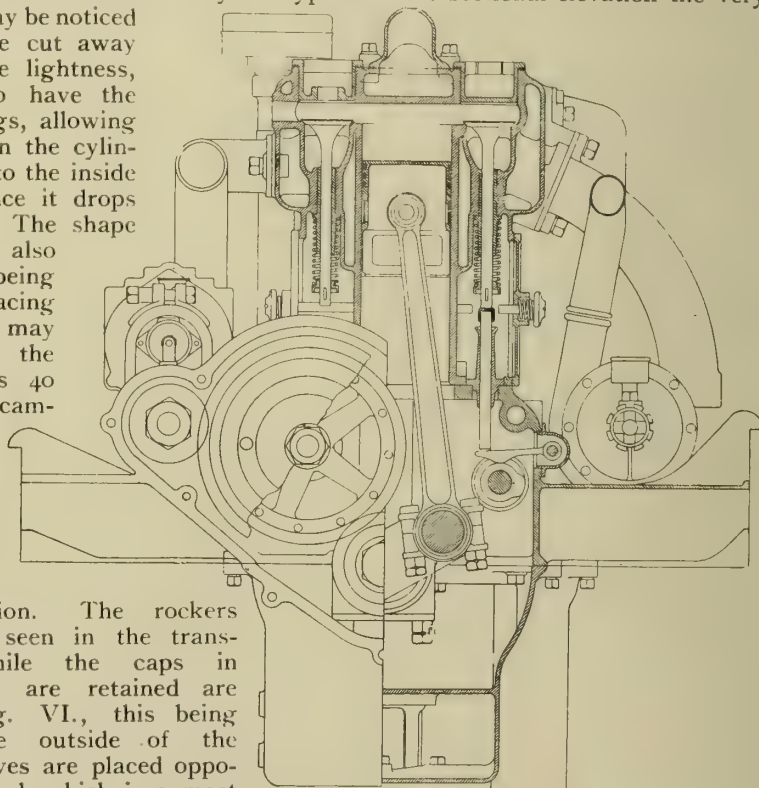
Fig. V. Transverse section of six-cylinder Sunbeam engine.
